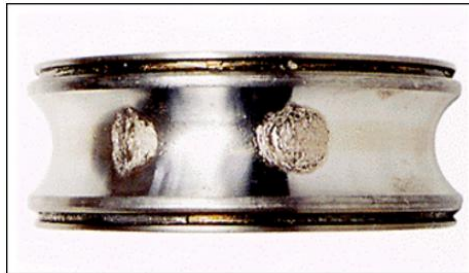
Appearance of flaking on a bearing inner ring¹⁾
